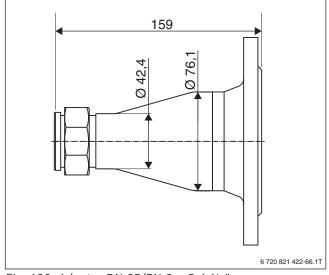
Adaptor DN 65/PN 6 - G 1 ½ " (dimensions in mm)
